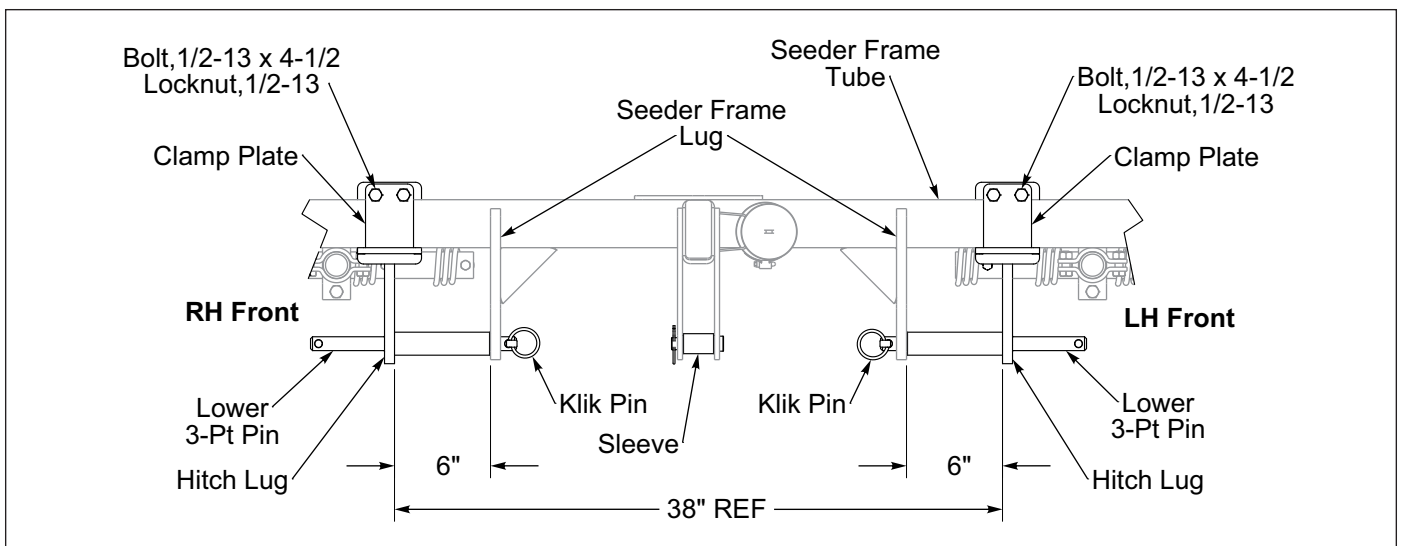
CAT2 Quick Coupler Hitch Dimensions
